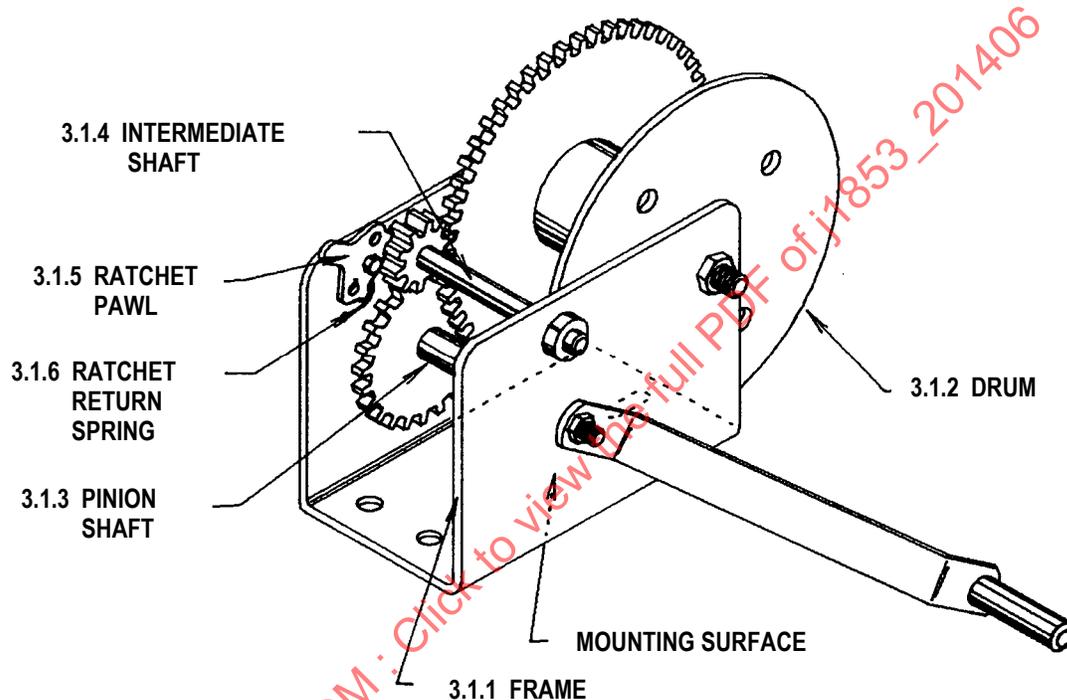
COMPONENT PARTS OF THE WINCH
